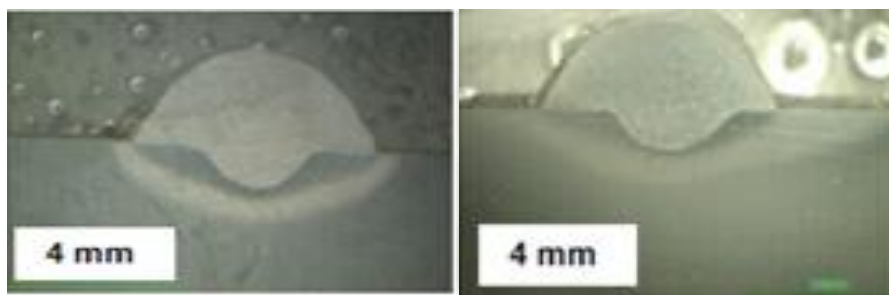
Macrographs of CMT weld (left) and laser CMT assisted weld (right) of 3 kW laser power, 20 mm process distance, 15 mm beam diameter and 5 m/min CMT WFS
